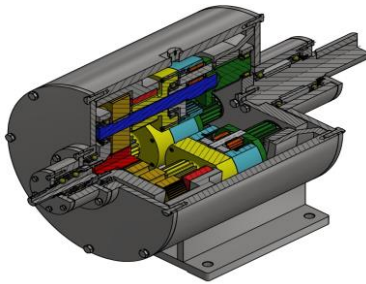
Cross-section of a coupled cylindrical biplanetary gear
